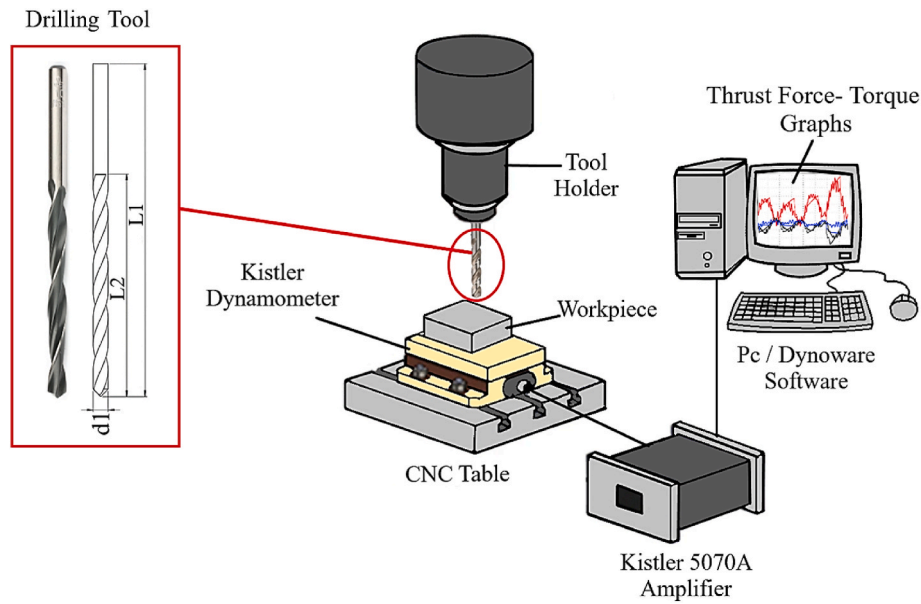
Schematic arrangement of the experimental setup for measuring cutting forces.
